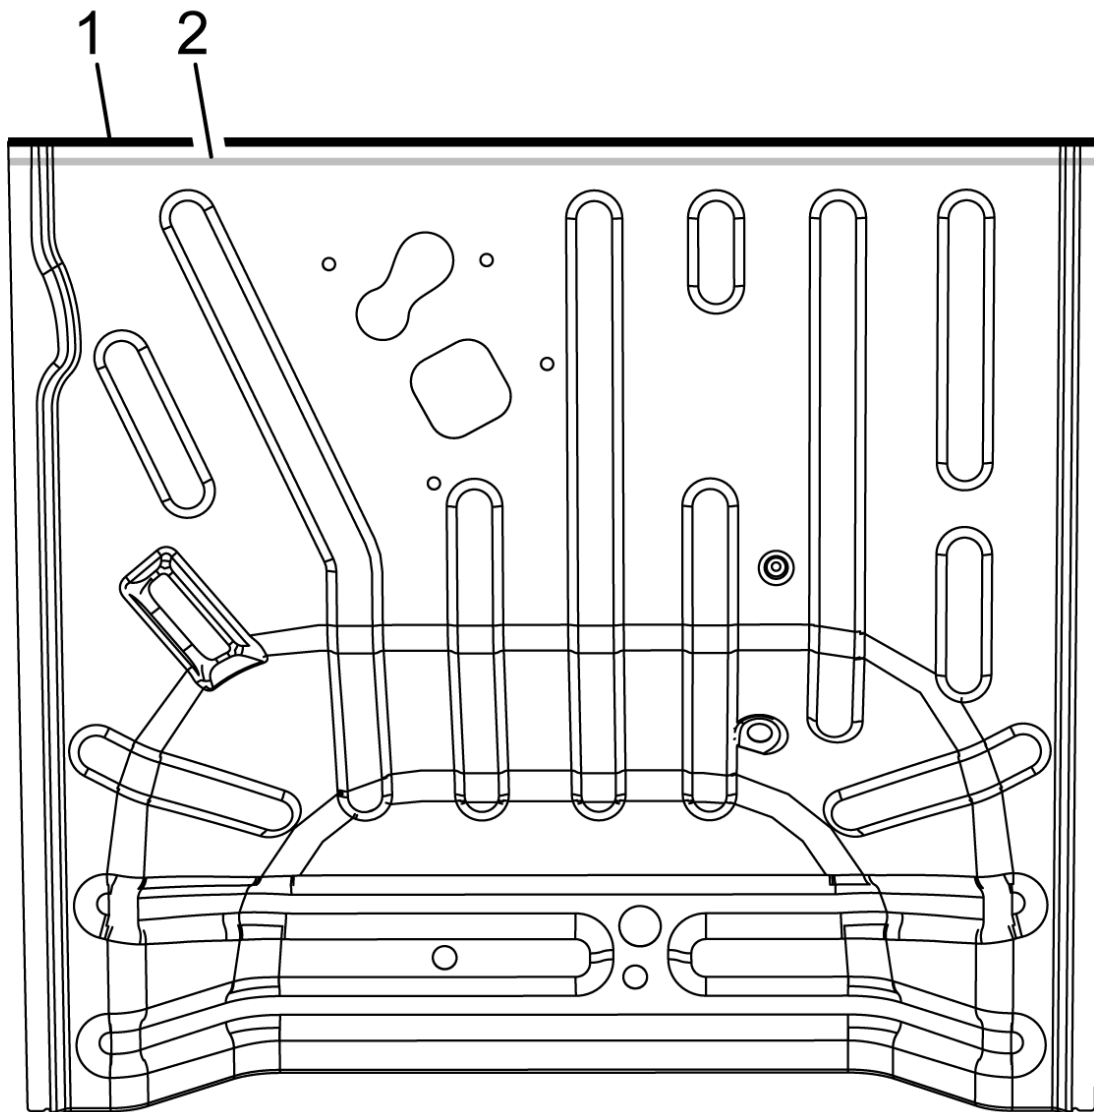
Marking Service Part For Plug Welding Locations
